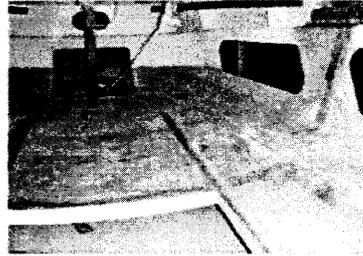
Boat upside down and inside glass stripped ready for new stiffeners.
